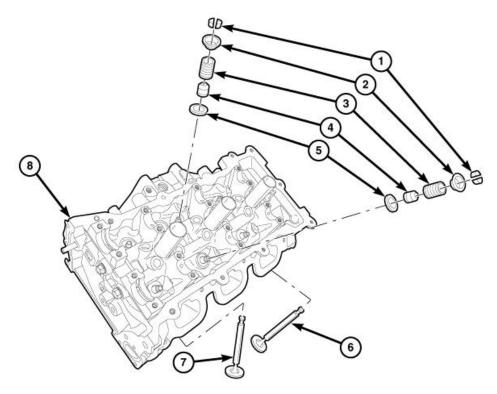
Intake Valve & Exhaust Valve Component Configuration Courtesy of CHRYSLER GROUP, LLC
